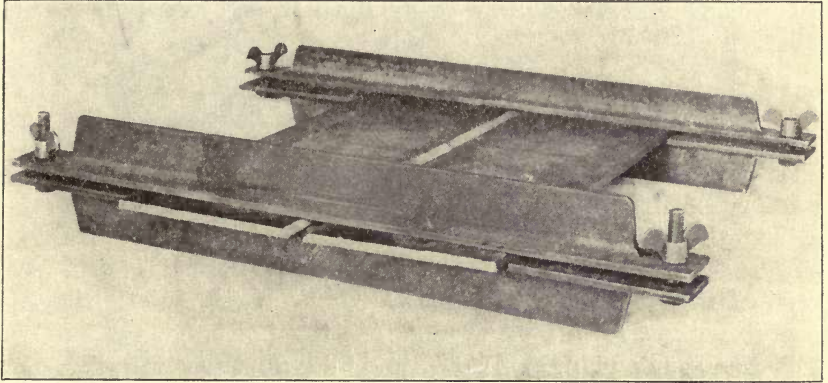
STRIP CLAMPED READY FOR WELDING.
